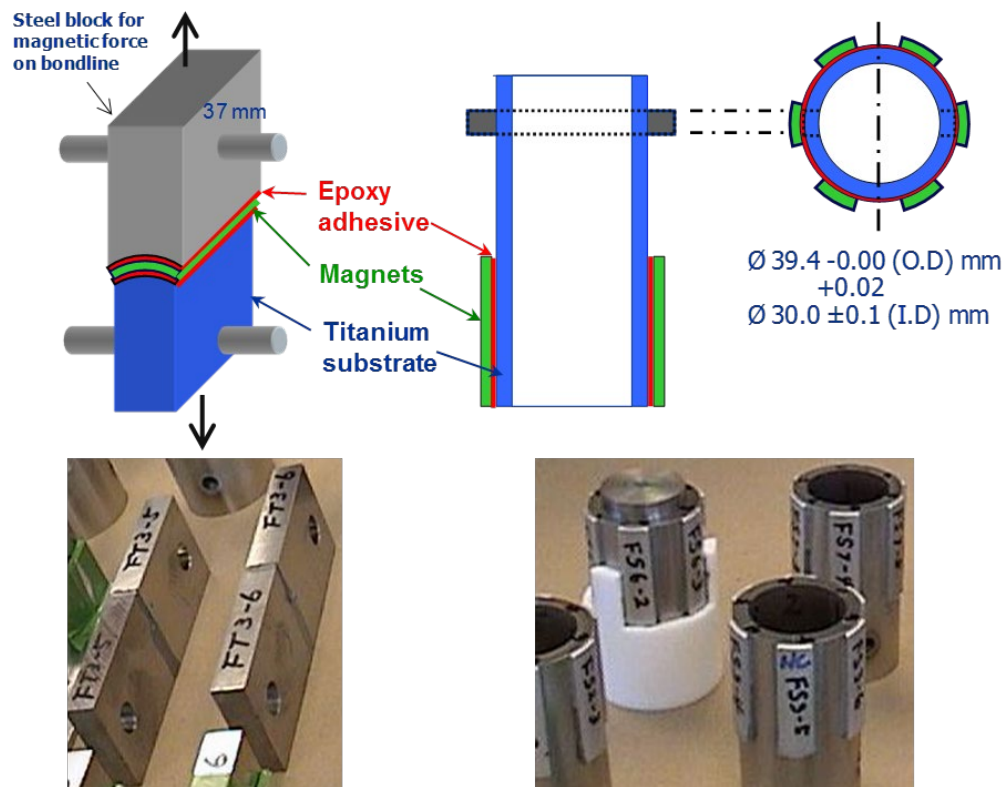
Schematics and pictures of full-scale test specimens for bonding performance measurement of adhesive materials: FWT specimens on left side, Tubular shear assemblies (six test specimens per tube) on right side.
